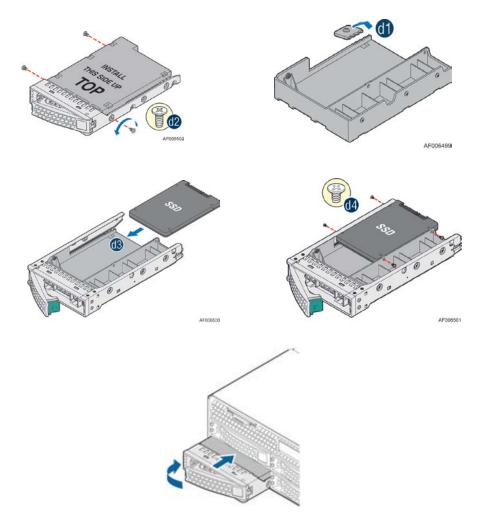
2.5" SSD mounted to 3.5" Drive Tray
